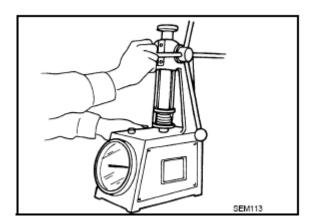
Checking Valve Spring Dimensions And Valve Spring Pressure Load Courtesy of NISSAN NORTH AMERICA, INC.
